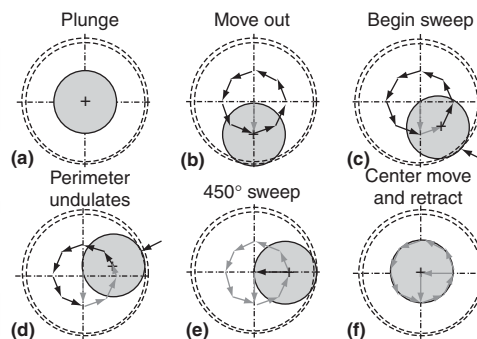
Path moved by the tool in an Octaspot weld. Source: Ref 101
